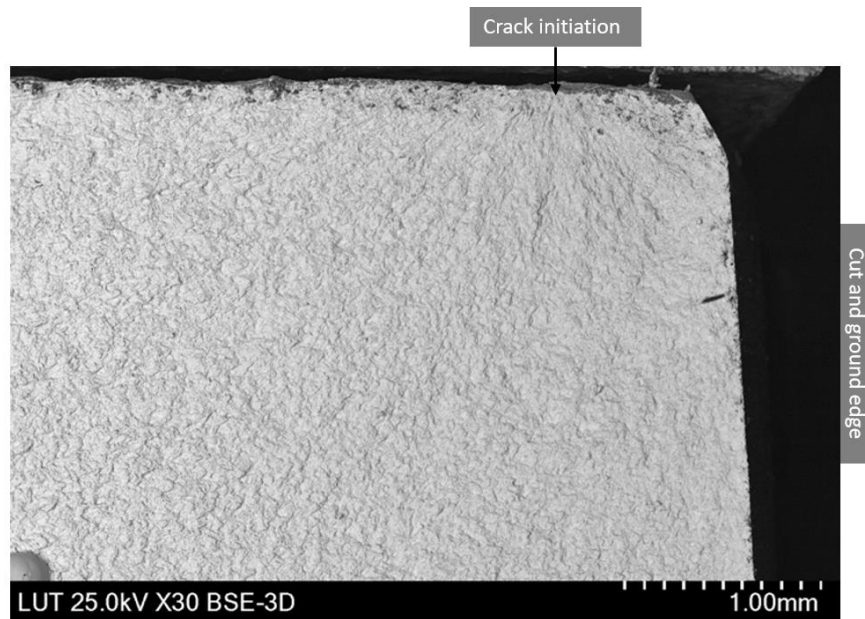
Fracture surface of LC5-5 –specimen failure from ground section.
